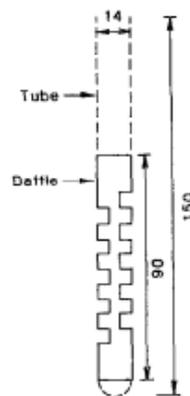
A baffle inserted in the cylinder shown in Fig. 2.
